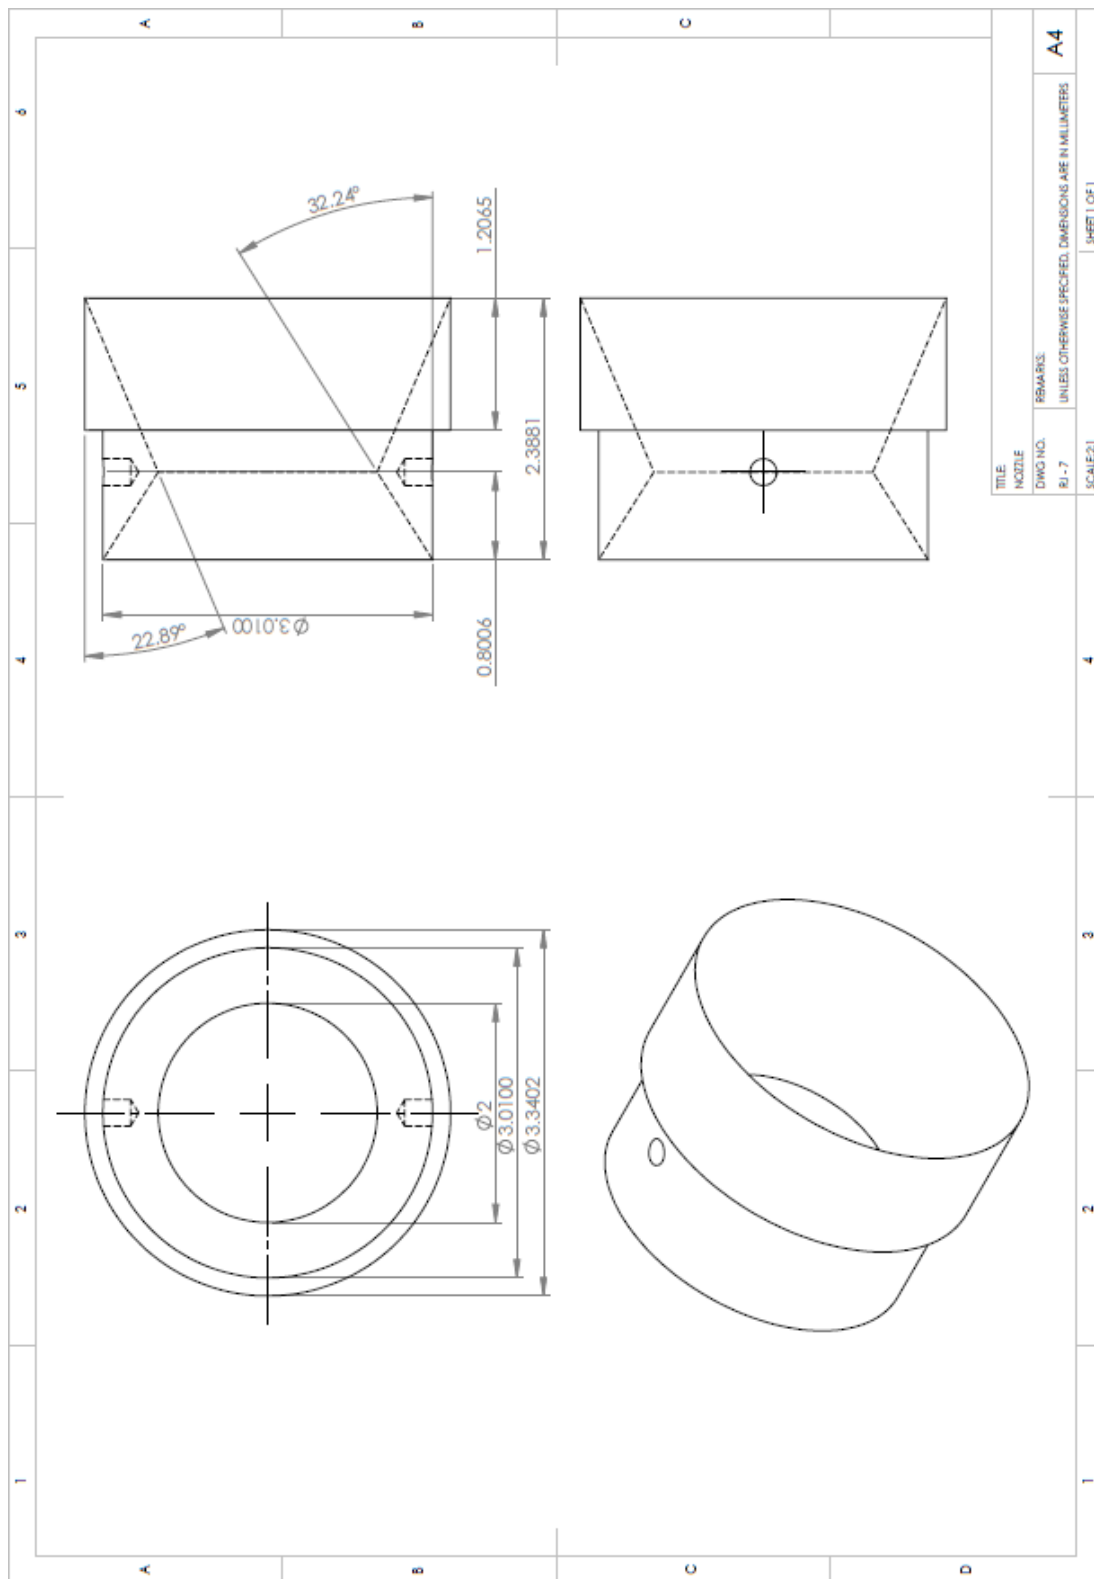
Part drawing: Ramjet nozzle (RJ – 7)
